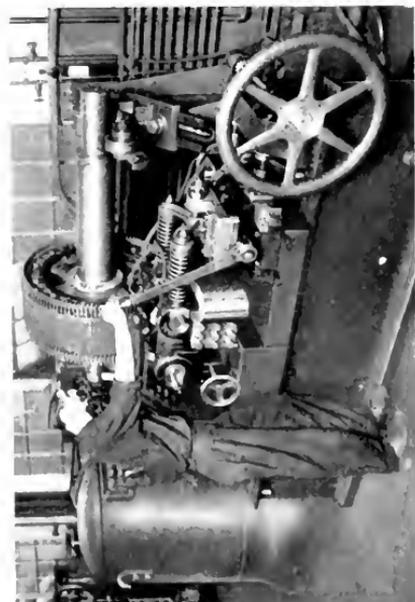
Large Welding Machine for Butt Welding End Rings to Induction Motor Rotor Bars
